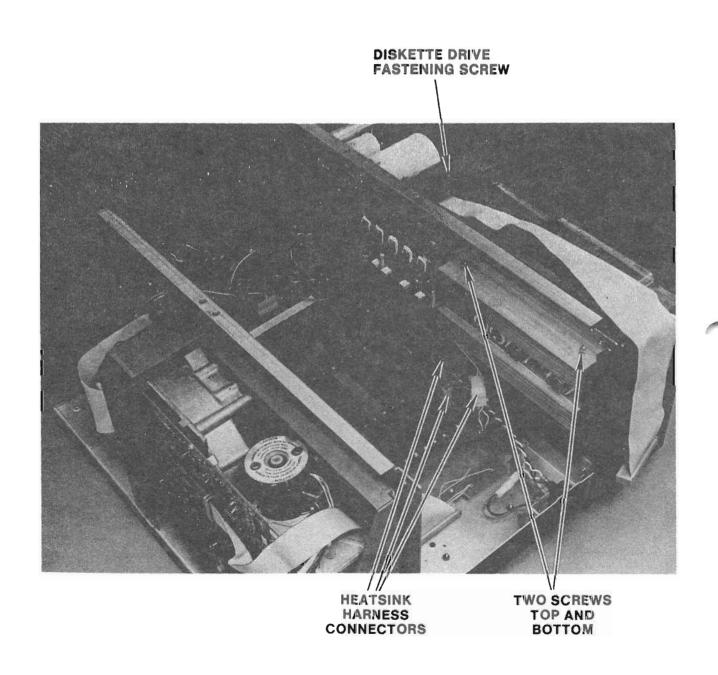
DSDD DISKETTE DRIVE REMOVAL; HEATSINK REMOVAL
